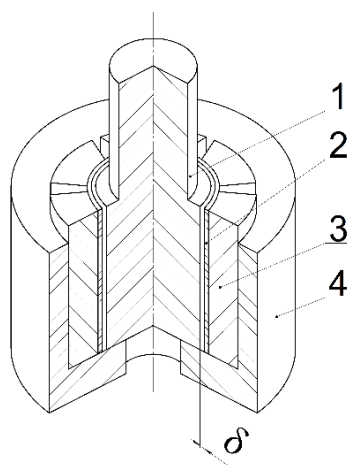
Equipment for diffusion welding of a cathode assembly:
